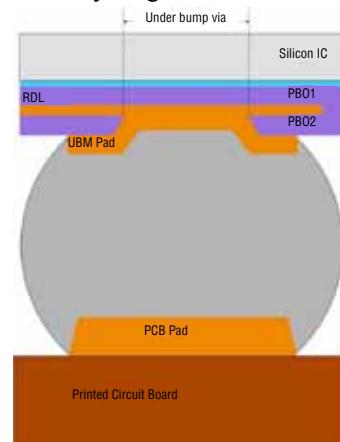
Illustration of WLCSP solder joint, showing main geometric factors: UBM pad, under bump via, and PCB pad.
